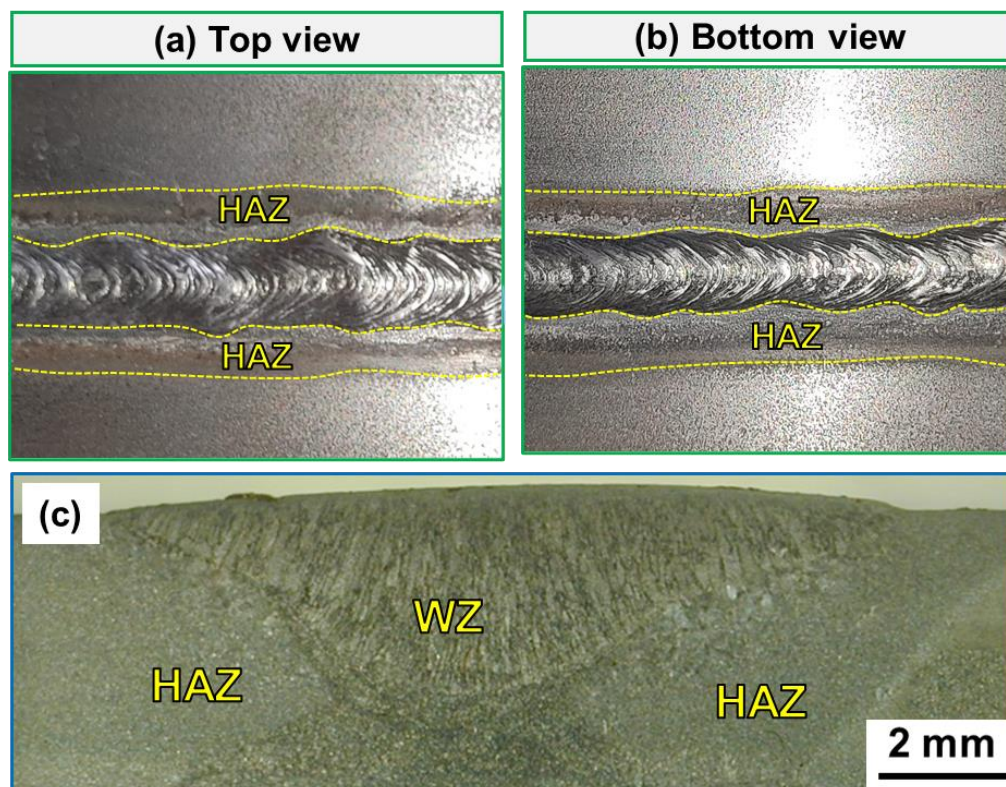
FCAW welded Hardox 450 steel joints: (a) top view, (b) bottom view, and (c) cross-sectional macrostructure.
